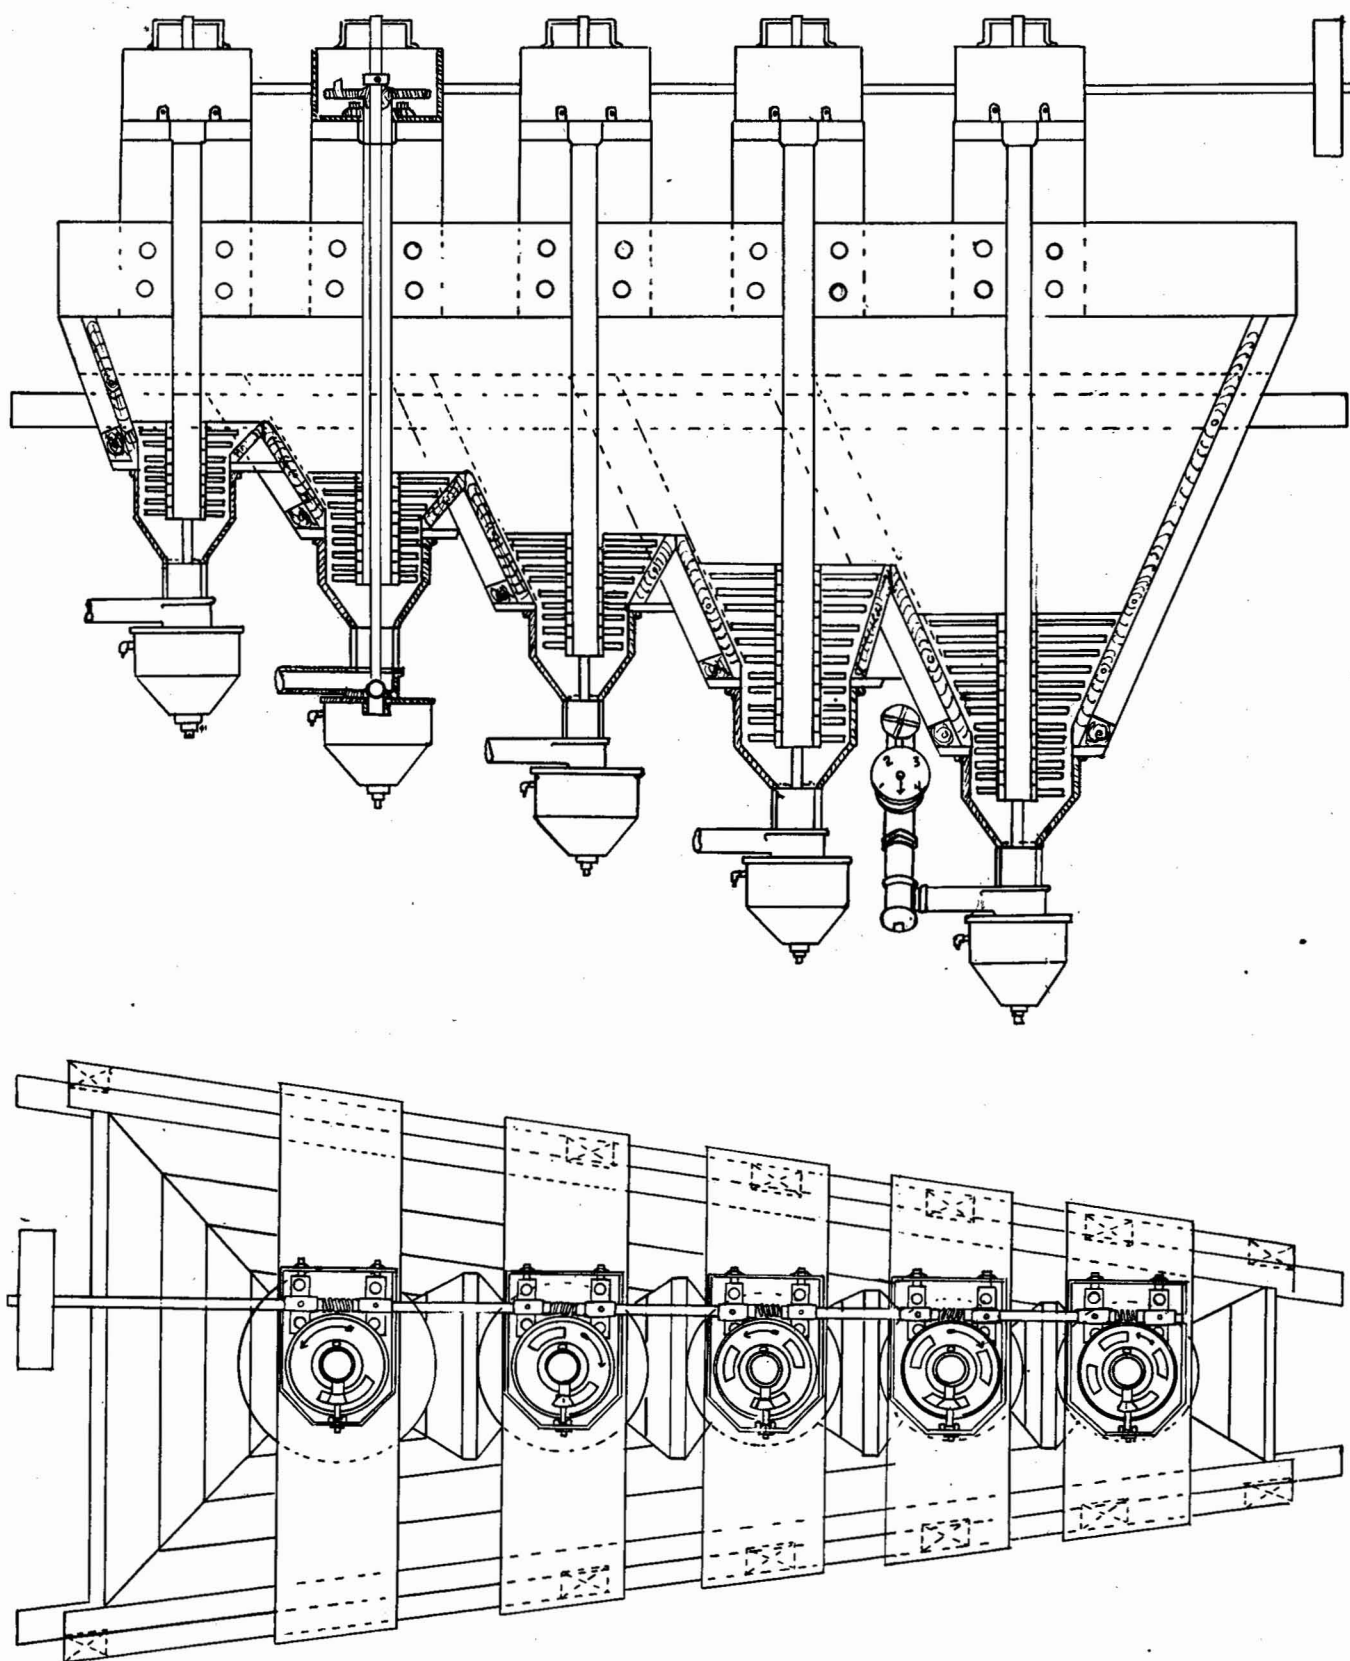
PLAN AND SECTION OF THE RICHARDS-JANNEY CLASSIFIER AS USED IN THE ARTHUR MILL
